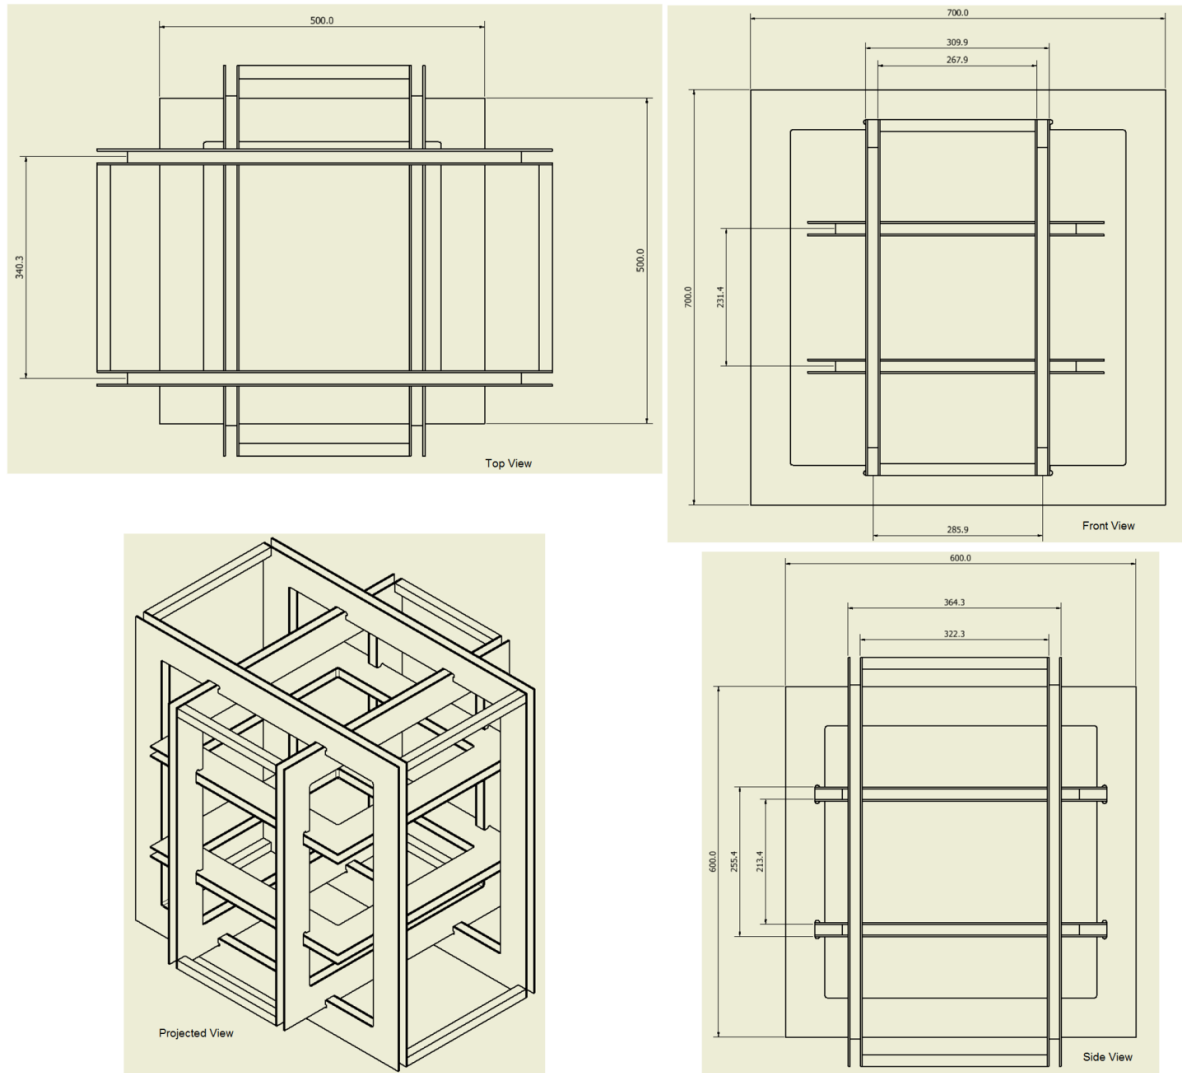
Drawing plans of three-axes Helmholtz coils, with dimensions shown in millimetres.
